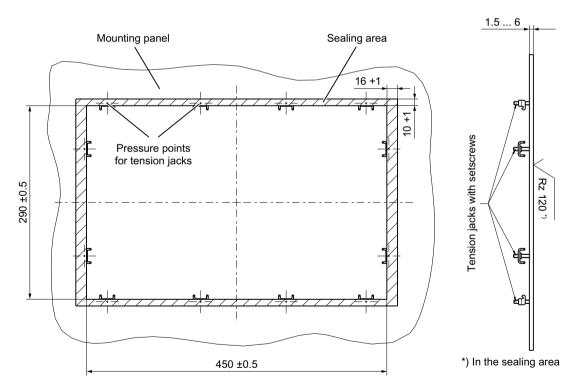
Dimension sheet for installing the OP 012 operator panel front
